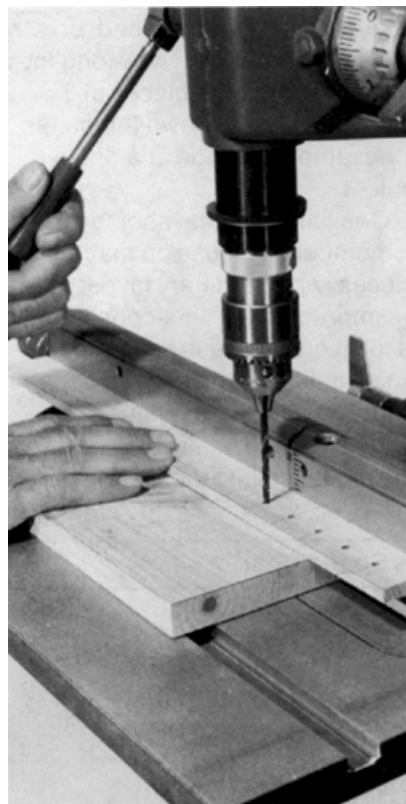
Use headless nails to mark hole locations for the second piece.
